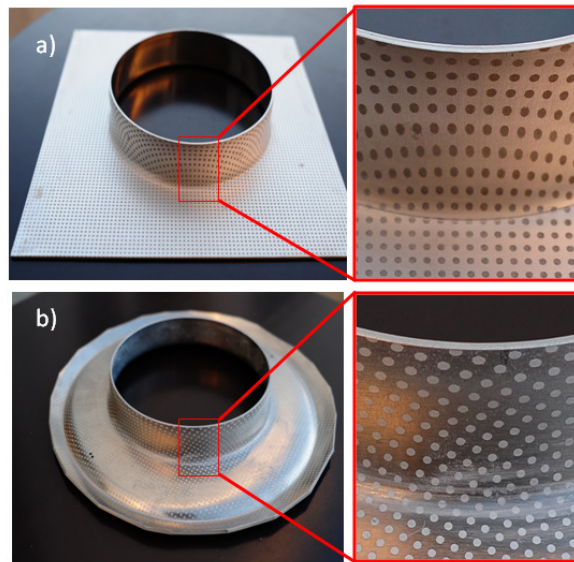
Flanged specimens with a pre cut hole with a diameter of 61 mm and 8 mm tool radius by SPIF at 0 rpm (a) and press working (b)
